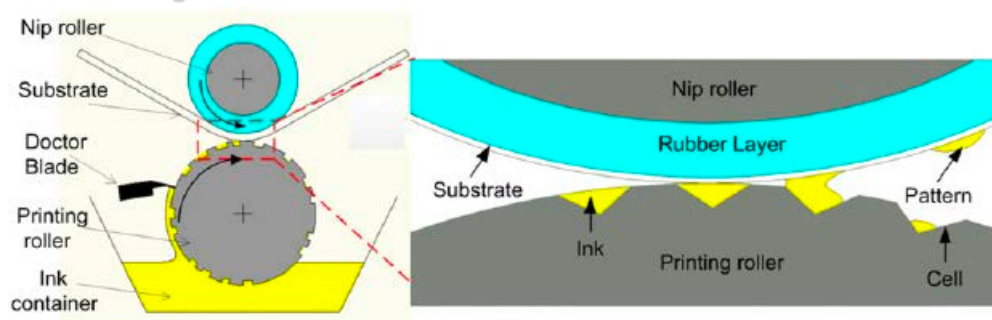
Schematic of the R2R gravure printing process: overall configuration of printing process between printing and nip rollers, and detailed view of the contact point.<sup>134</sup>
